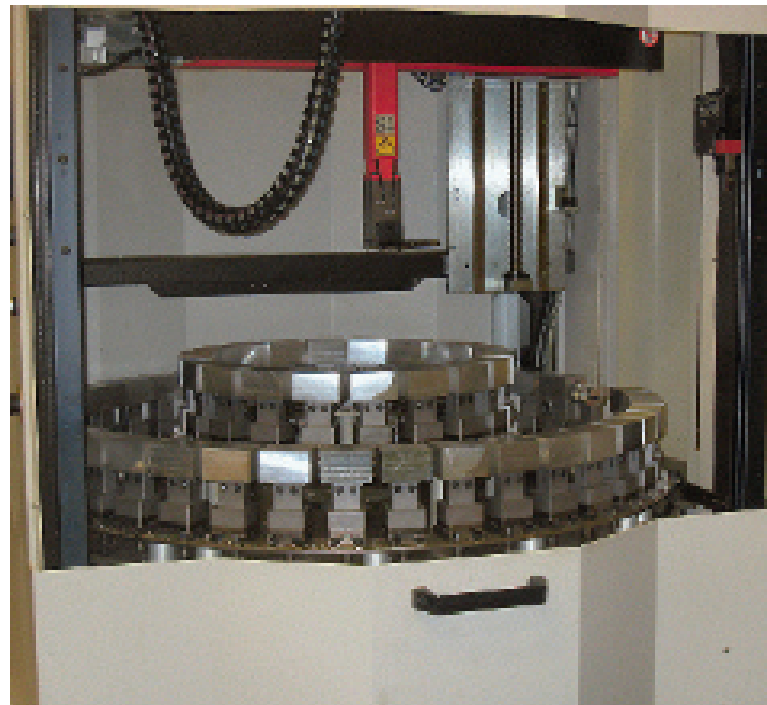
A System R loading robot for feeding rough blanks into a milling machine and taking out the milled products.
